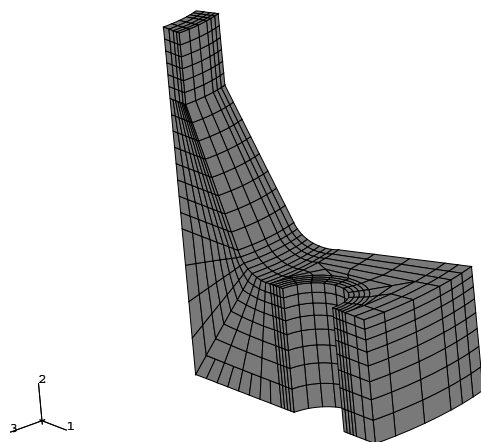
22.5° segment three-dimensional model of the bolted joint.
